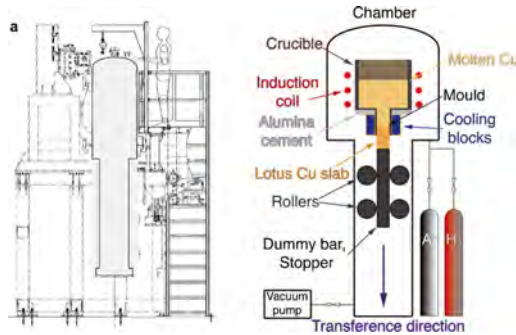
Schematic drawing of the fabrication apparatus to produce lotus metals using the continuous casting technique. Large crucible and induction heating coil are located in the upper part of the pressure vessel, while the mould with cooling blocks and movable mechanism are in the bottom of the crucible. The height of the apparatus is about 7 m. About 1 m lotus ingot in length can be produced. The dummy bar is connected together with the melt at the mould.
